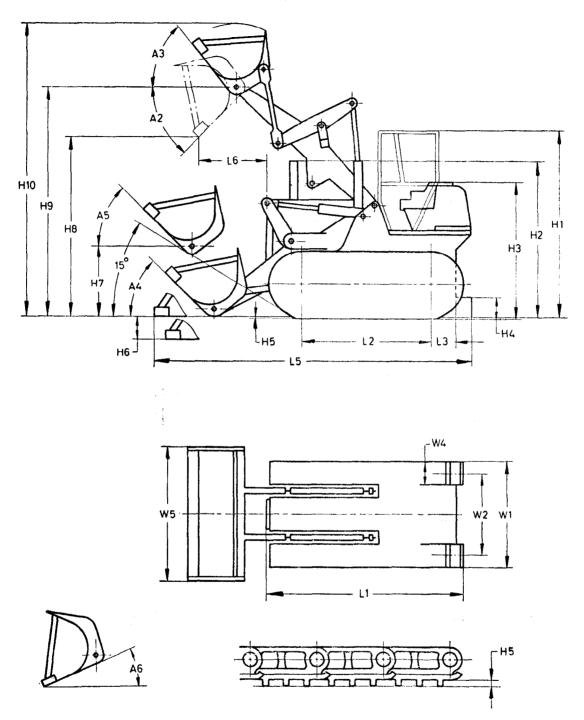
DIMENSIONS OF BASE MACHINE (CRAWLER LOADER)
